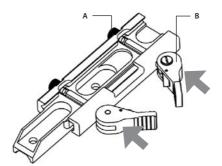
CLAMPING DEVICE ADJUSTMENT
